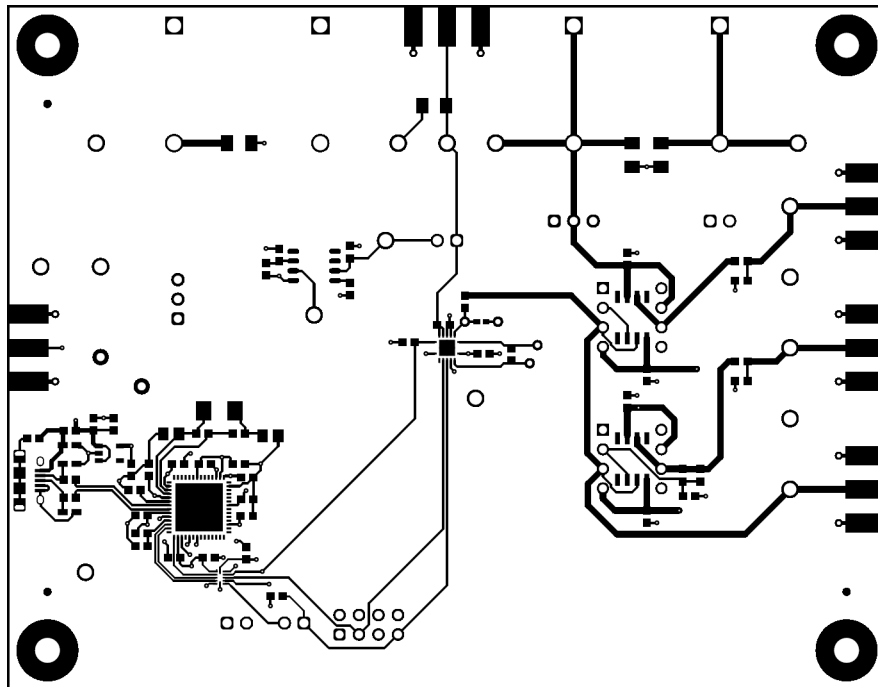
DAC8831EVM PCB Top Layer Layout
